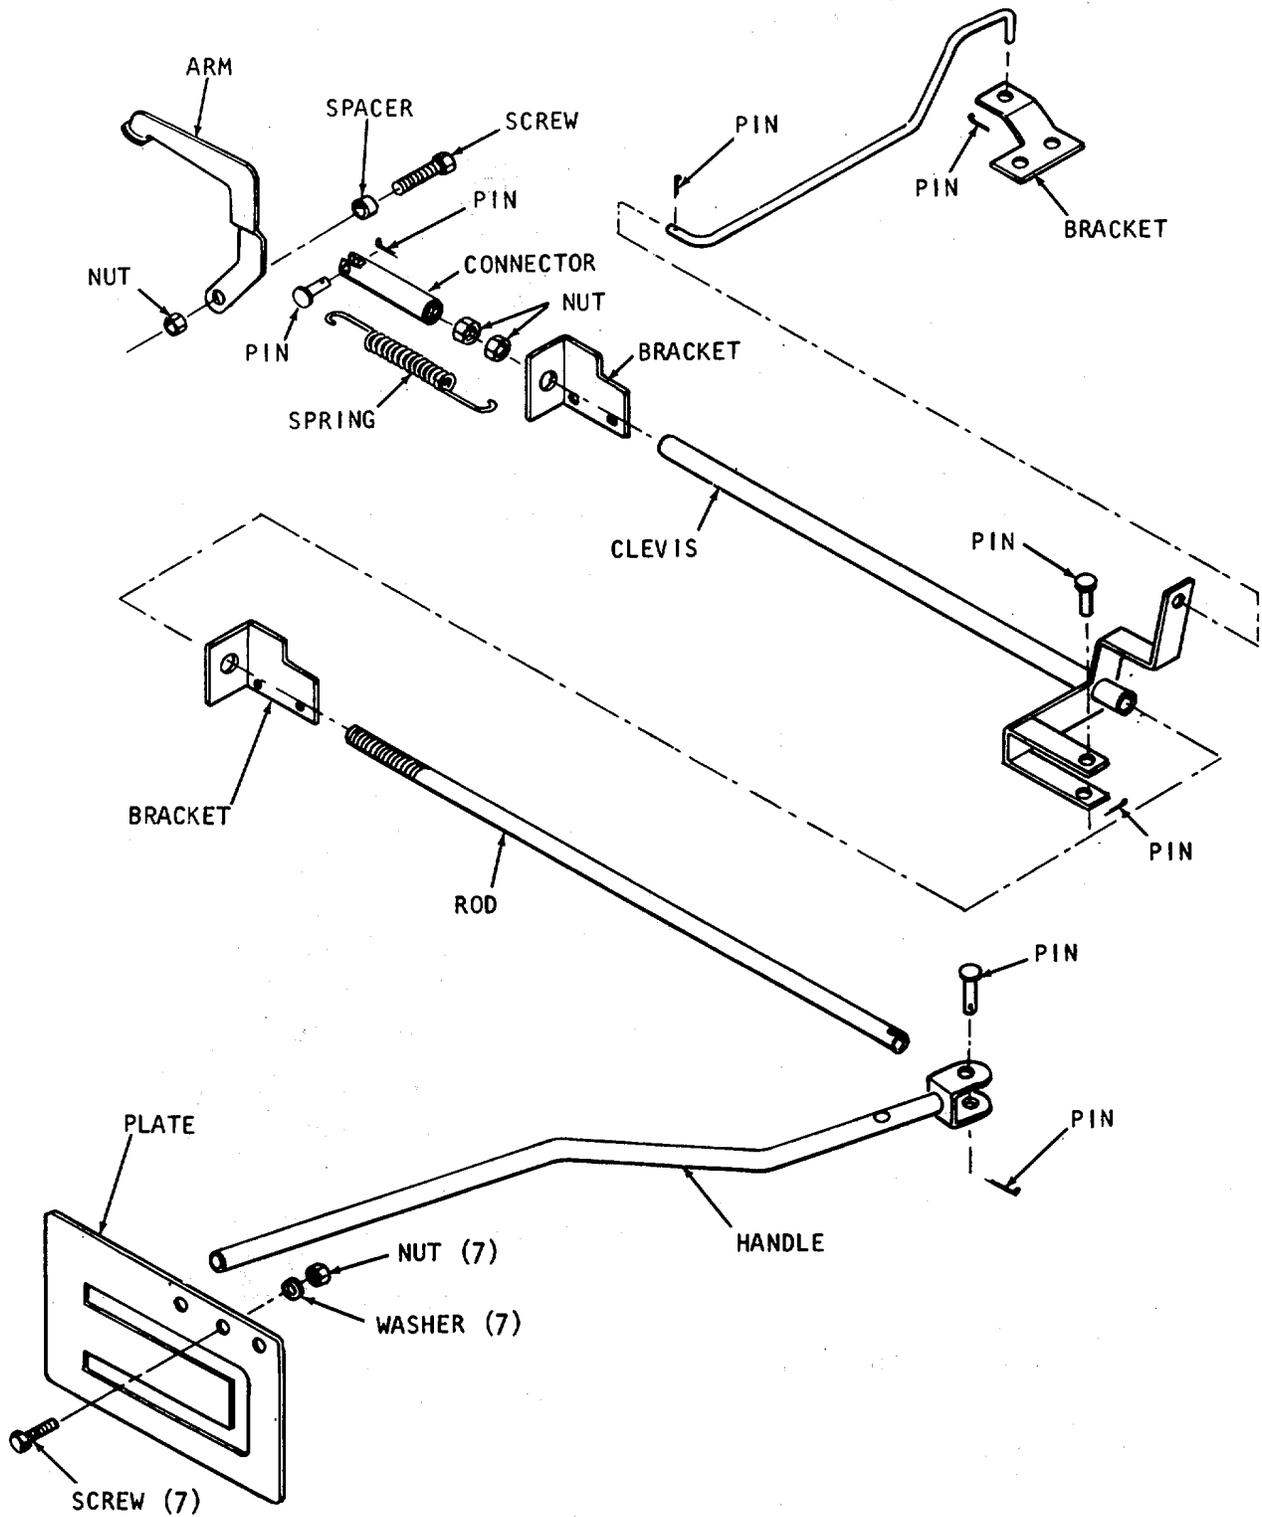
A. Pump clutch linkage, for model FT-500, exploded view.
